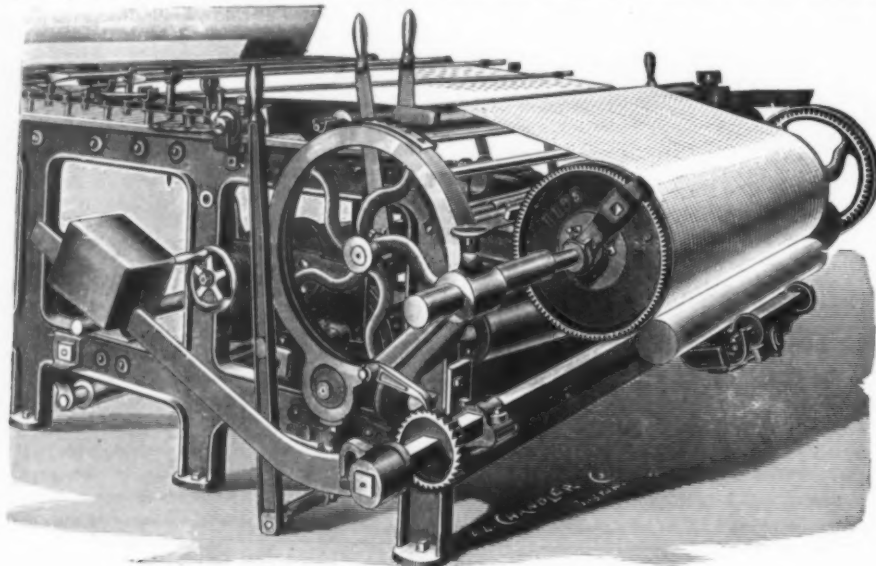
IMPROVED TRAVERSE PRESS-ROLL ATTACHMENT.
